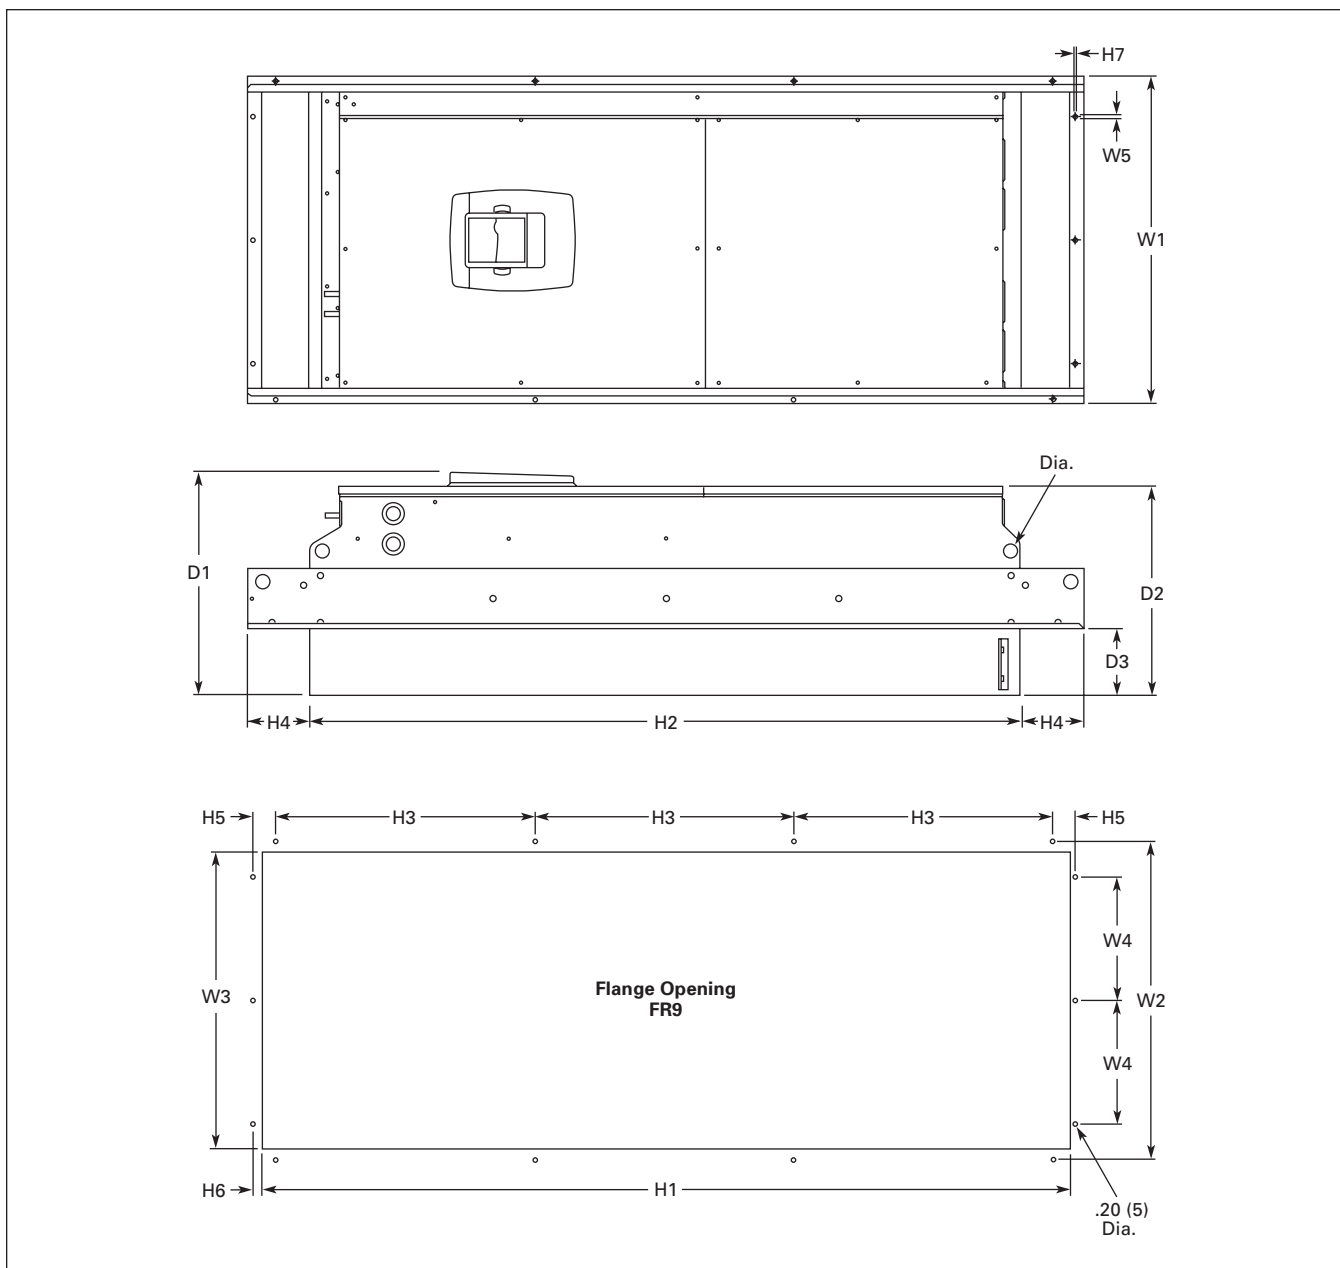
HVX9000 Dimensions, NEMA Type 1 and NEMA Type 12 FR9 with Flange Kit
